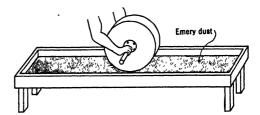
Old method of re-coating wheel. Operator rolls glue-covered wheel back and forth in trough containing emery dust.
